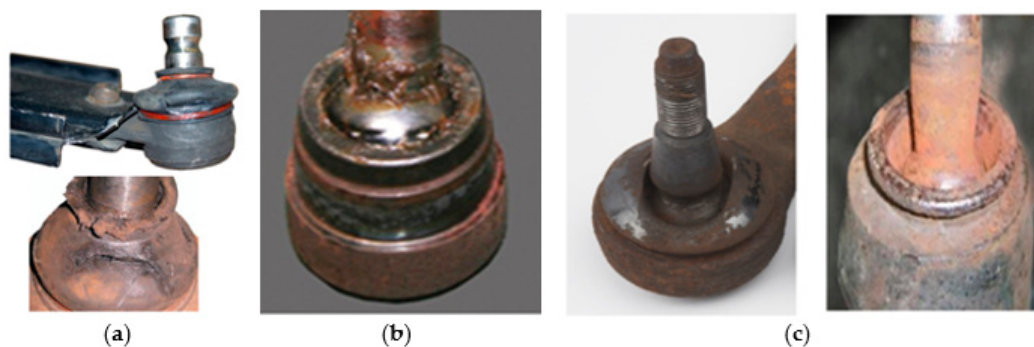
The most often defects of the ball joints: (a) Ripped rubber cover; (b) Frozen ball joint; (c) Corrosion of a mandrel.
